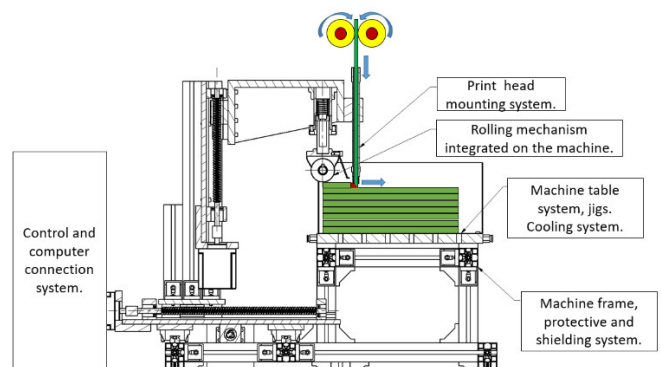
The diagram of 3D printer integrated rolling mechanism [14]
